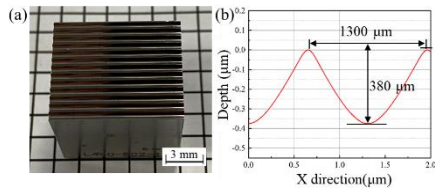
The diffuser mold (a) sample and (b) geometric dimension
